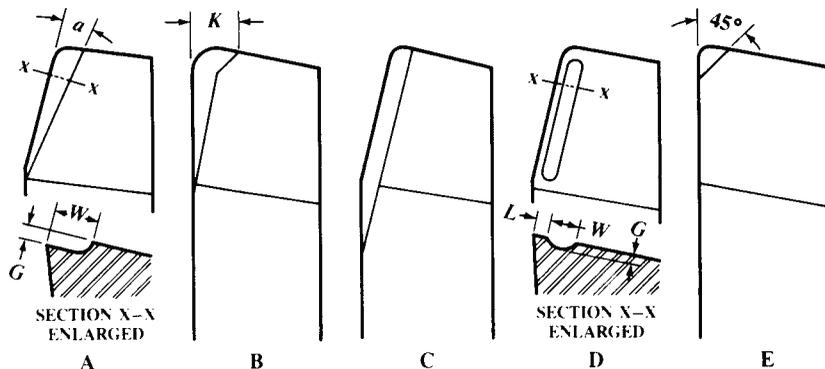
Different Forms of Chipbreakers for Turning Tools
